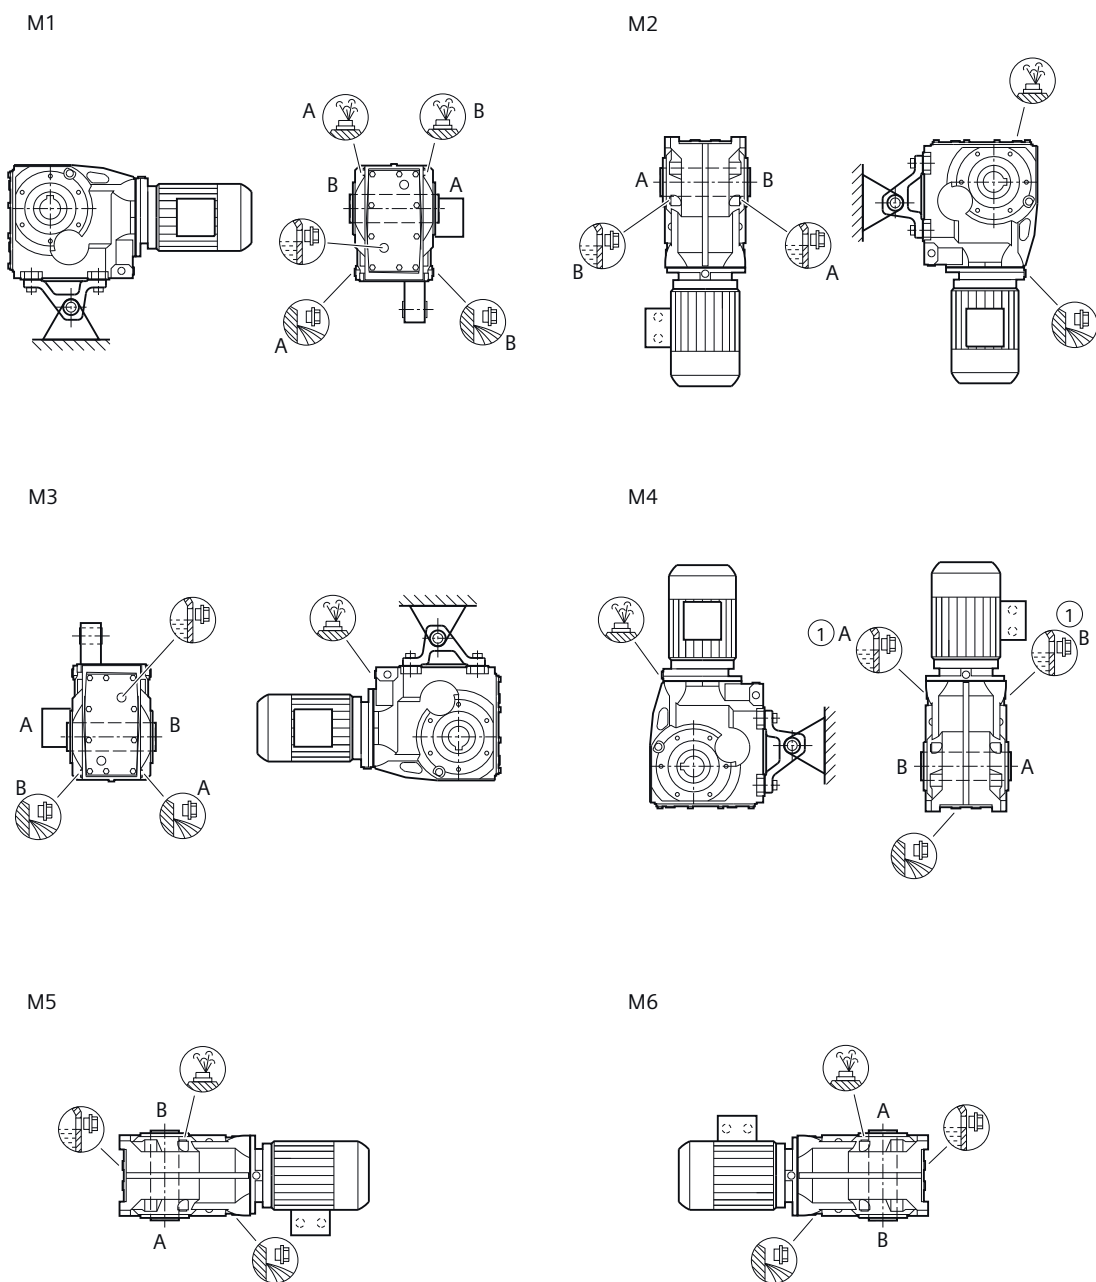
Mounting positions for bevel gearboxes KAD shaft-mounted design, sizes 39 - 189
